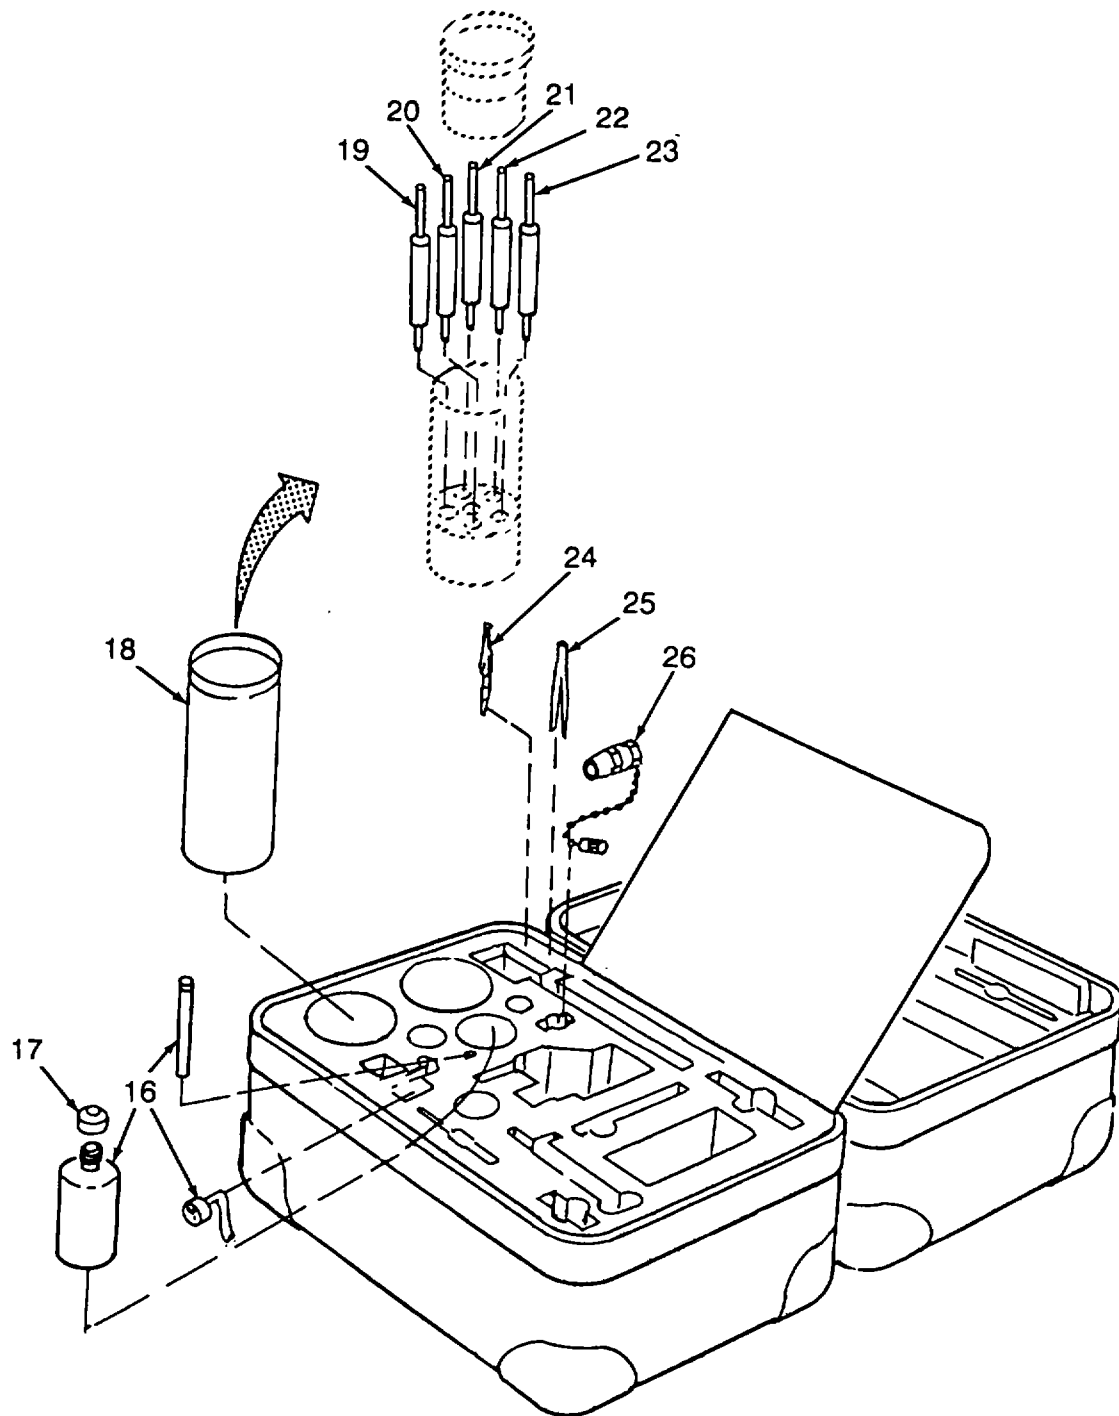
Petroleum Test Kit (Sheet 2 of 5)
